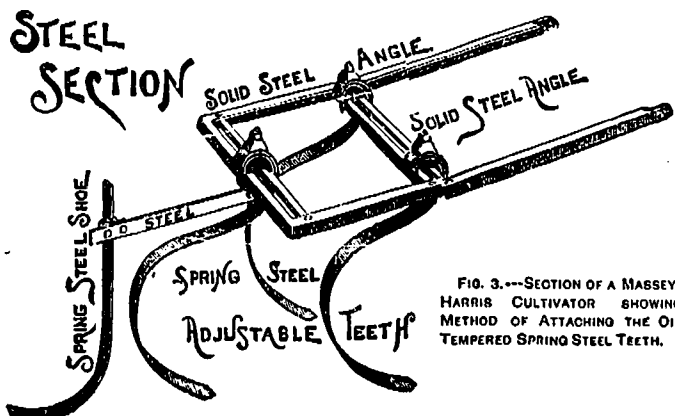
SECTION OF A MASSEY-HARRIS CULTIVATOR SHOWING METHOD OF ATTACHING THE OIL TEMPERED SPRING STEEL TEETH.
